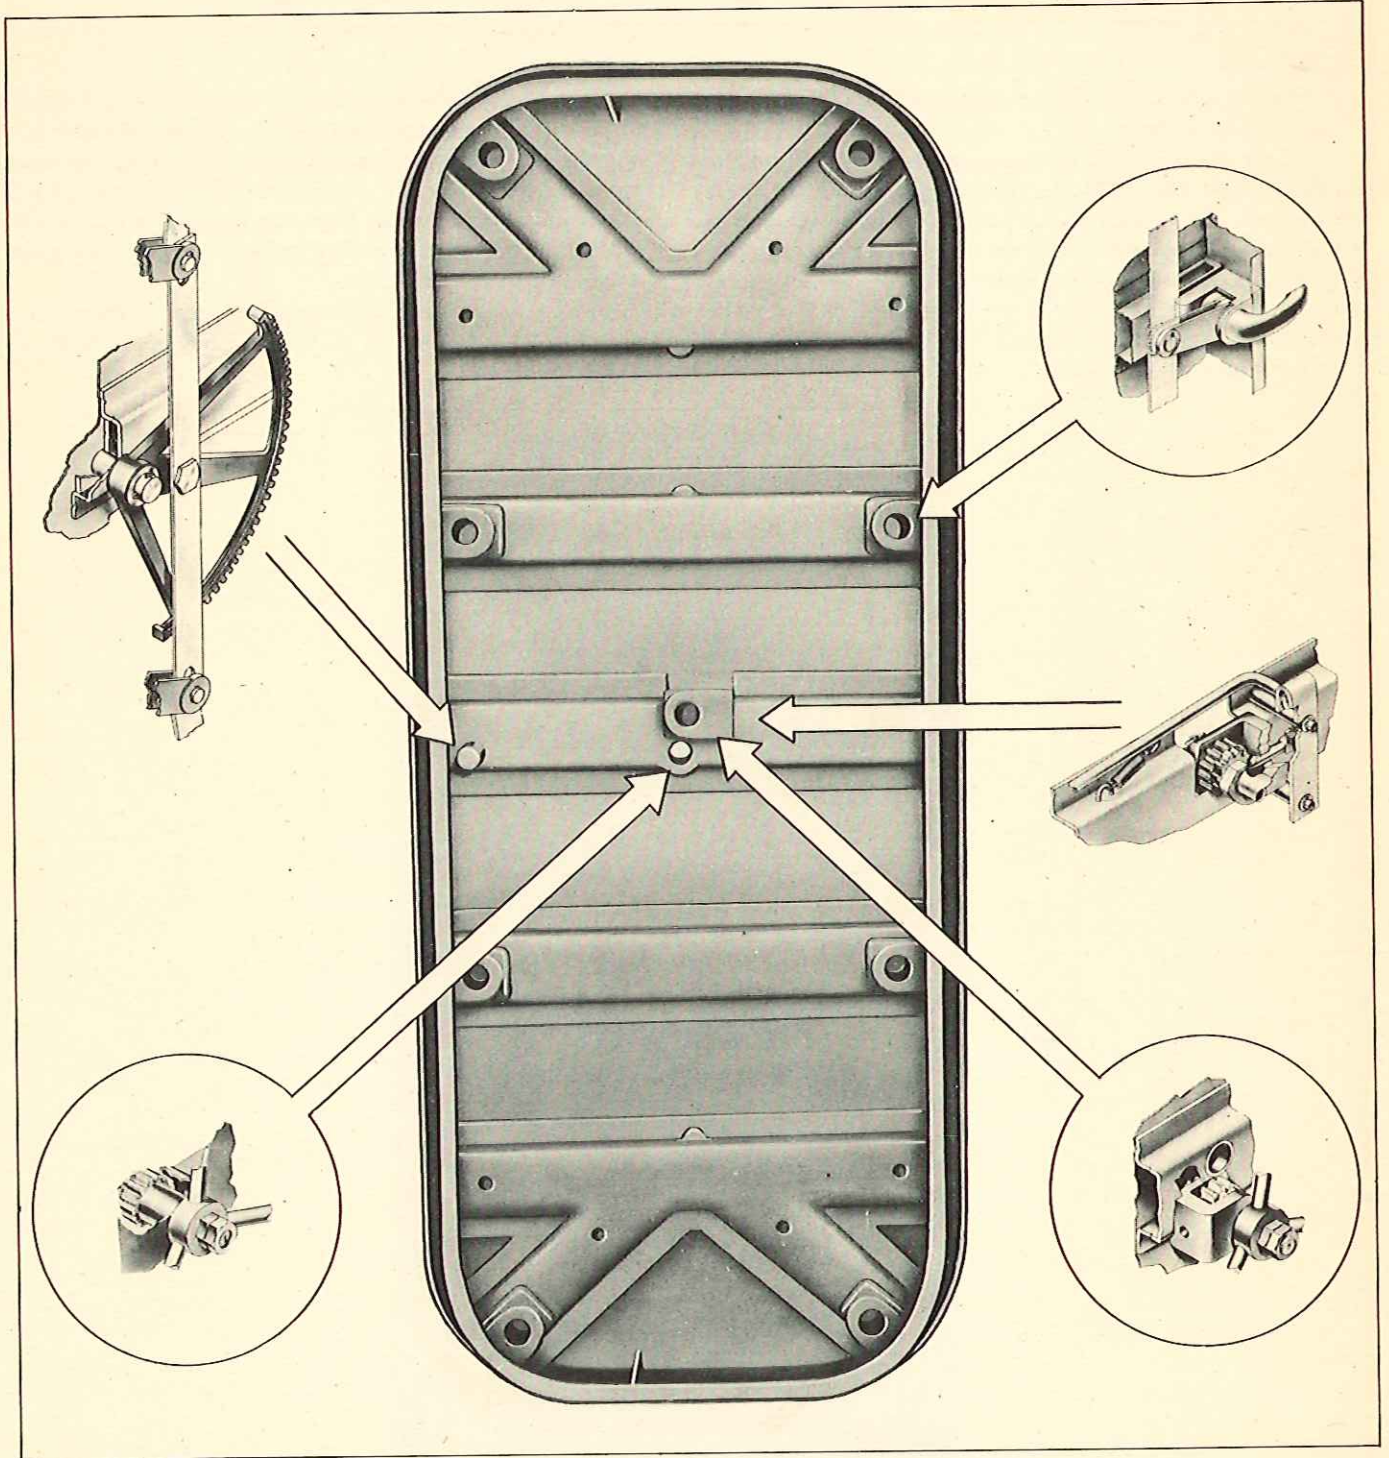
Inside view, TLD-3 (ms) door, showing shell with main assemblies pulled out.
